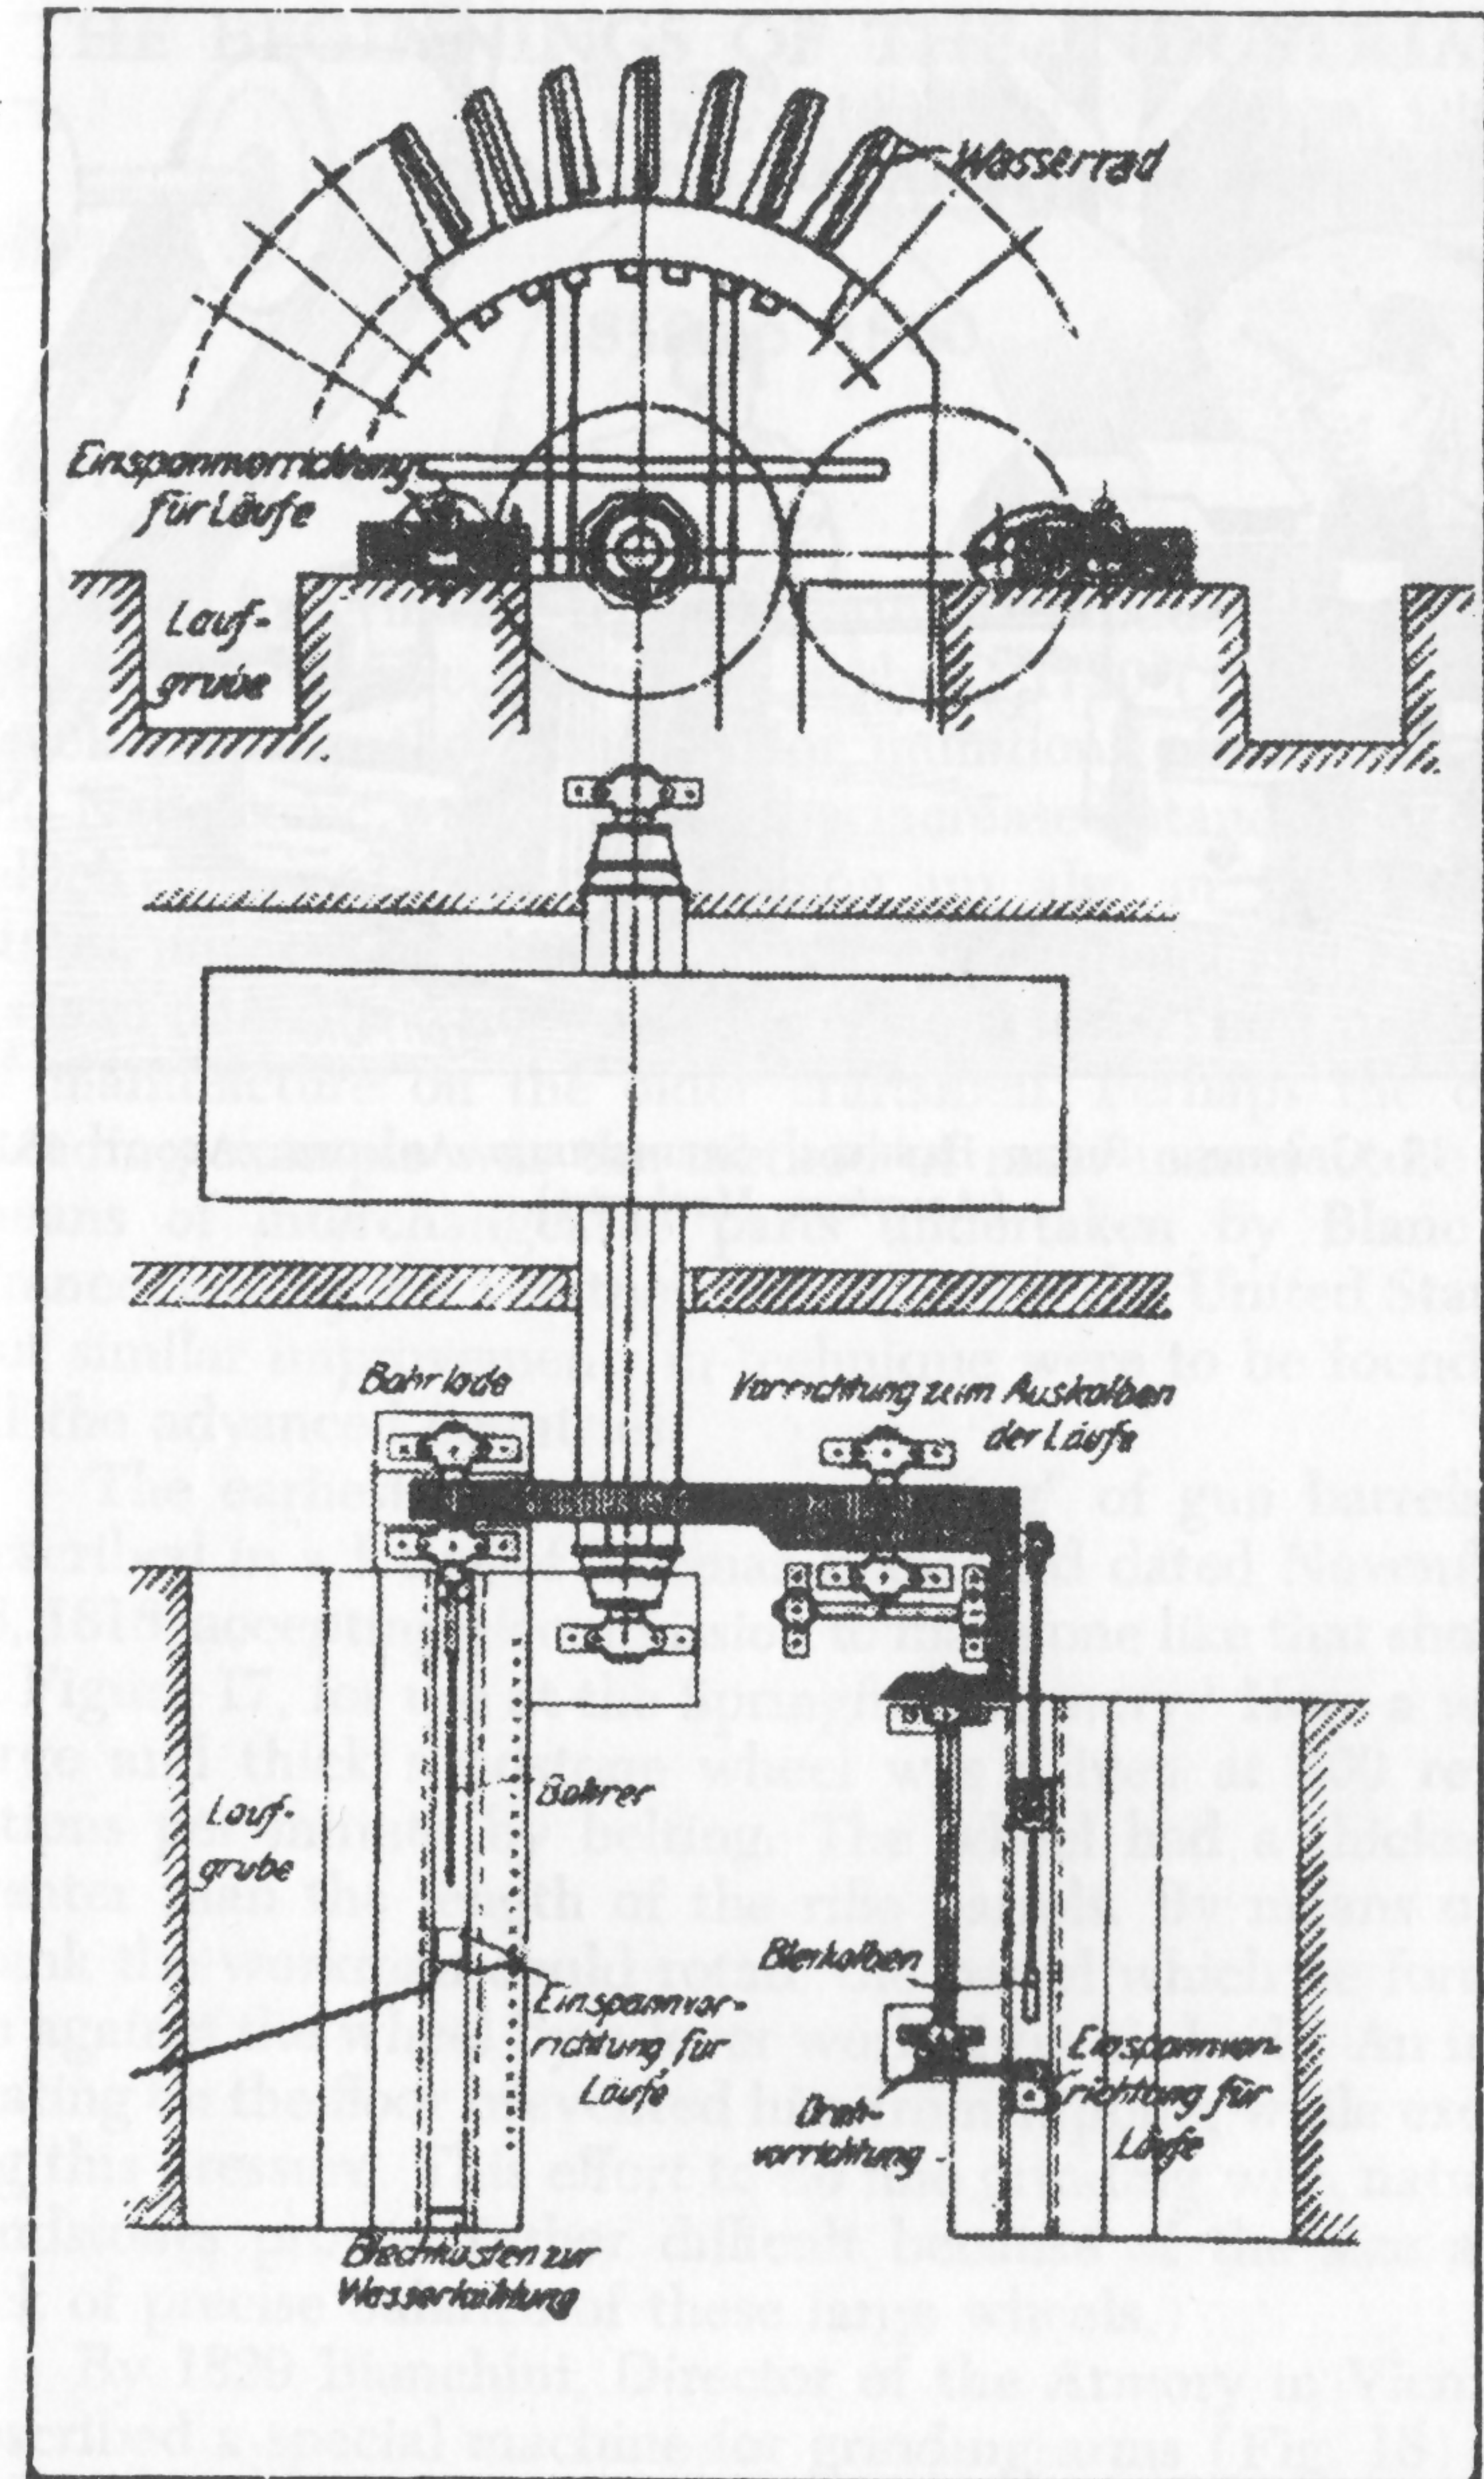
BORING AND GRINDING MACHINE OF 1780 (Schroeder)
